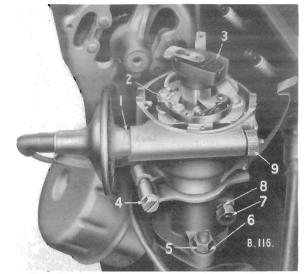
Distributor rotor arm position at T.D.C. Firing on No. 1 cylinder (Herald 1200, 12/50)
